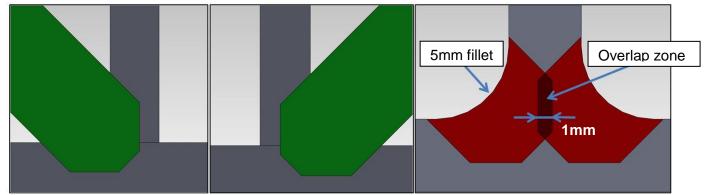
To the left and in the middle, schematic pictures of the Probe and weld piece during a weld are shown. To the right the weld zones (red) and the overlap zone (dark red) of 1mm can be seen
